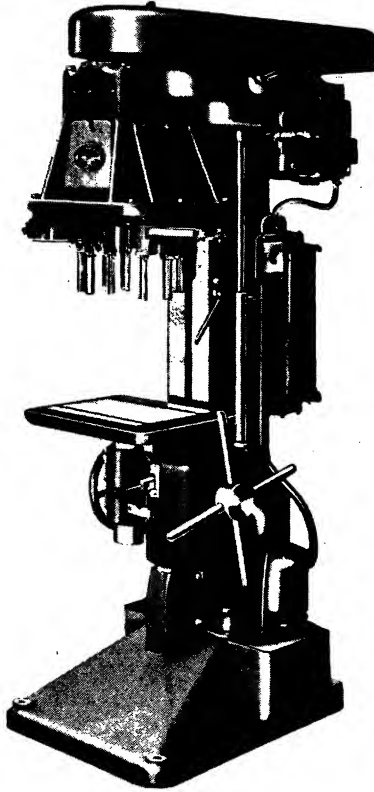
A. MULTI-SPINDLE DRILL WITH STATIONARY DRILLING HEAD:
